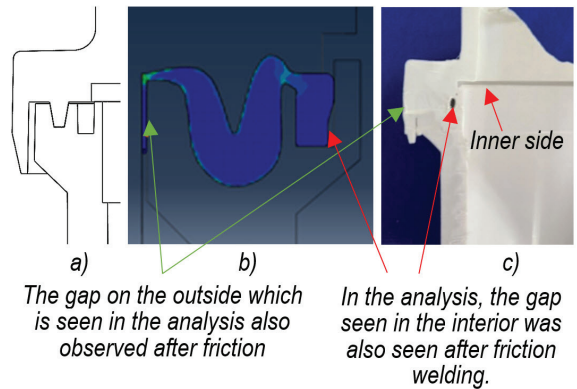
a) The design of generally used welding joint profile, b) ABAQUS analysis of weld joint profile with developed design [10], and c) the status of the existing semi-melted accumulation after friction welding
